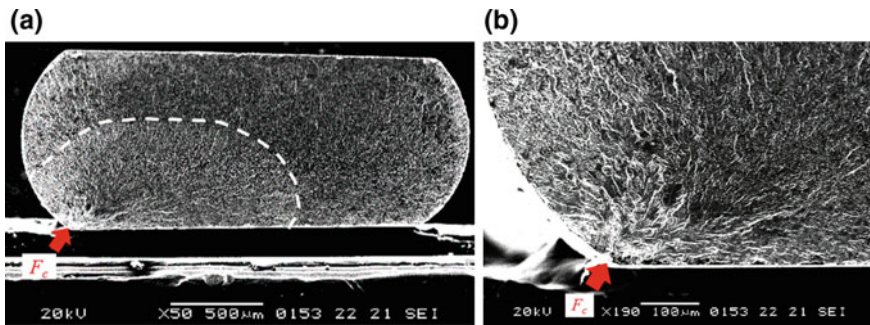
SEM photographs of the typical fracture surface of ion-implanted tape with 2.5×10^{18} ions/cm² for $\varepsilon_a = 3.12\%$ and $N_f = 6018$: a whole fracture surface, b crack initiation part
